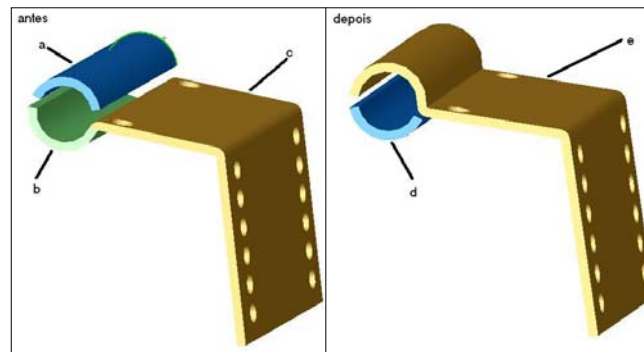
Representative figure of the redesign, being: a: Counter plate; b: Tube interface plate; c: Old supporting plate; d: Counter plate; e: Redesigned supporting plate.
